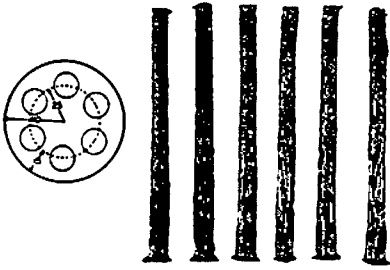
Appearance of compressed deformation of 6 tubes by using a single charge of explosive. Container-in. dia. 80×l 300 mm. Used Cu-tube out. dia. 14×in. dia. 12.4×l 100 mm. Used explosive charge : tetryl 20g.
